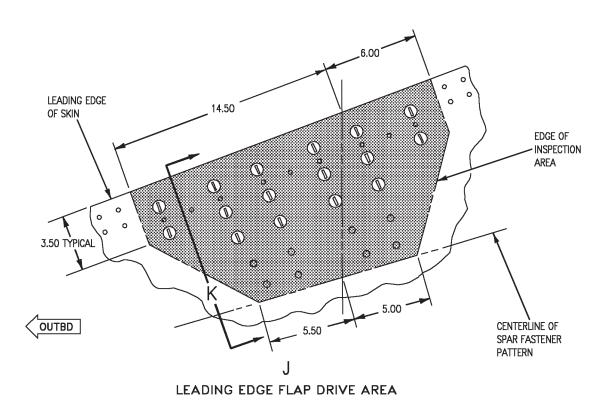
Inner Wing Upper Surface Solid Composite Laminate and Door Sill Inspection Areas (Sheet 4)
